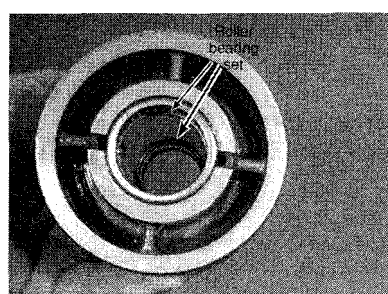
Examine the roller bearing sets in the bearing carrier housing and replace, if necessary
